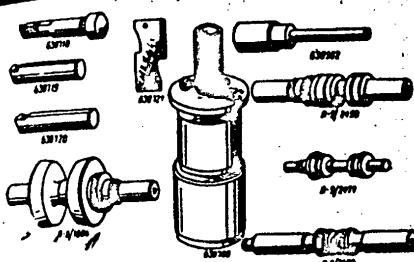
BEARING GEAR FOR CONNECTING ROD AND CONNECTING ROD BEARING
